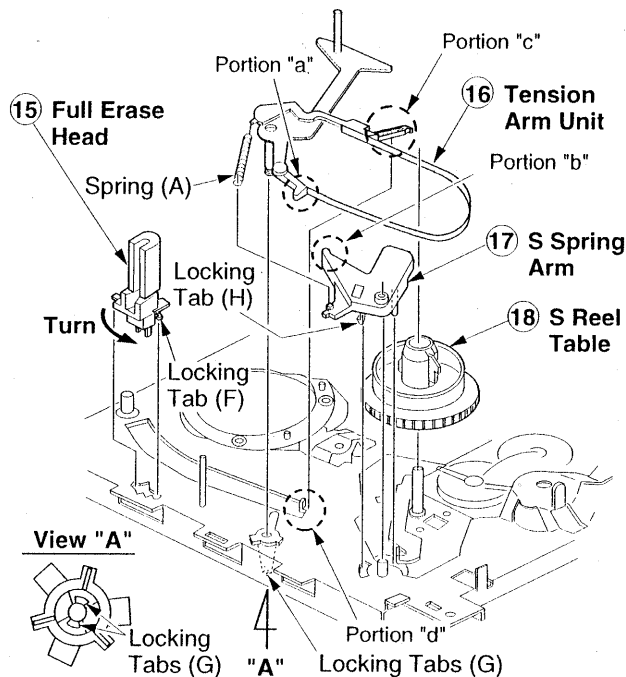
Full Erase Head/Tension Arm Unit/S-Spring Arm/S-Reel Table Removal
